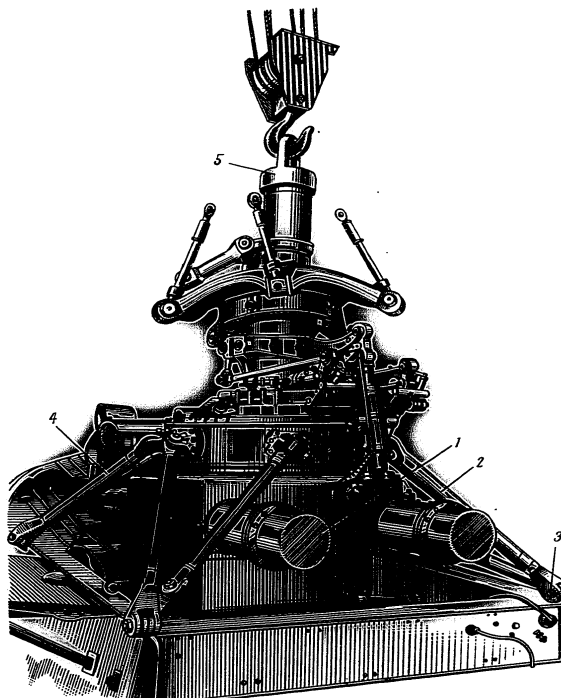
JOINTING P-7 MAIN GEAR BOX TO FUSELAGE
